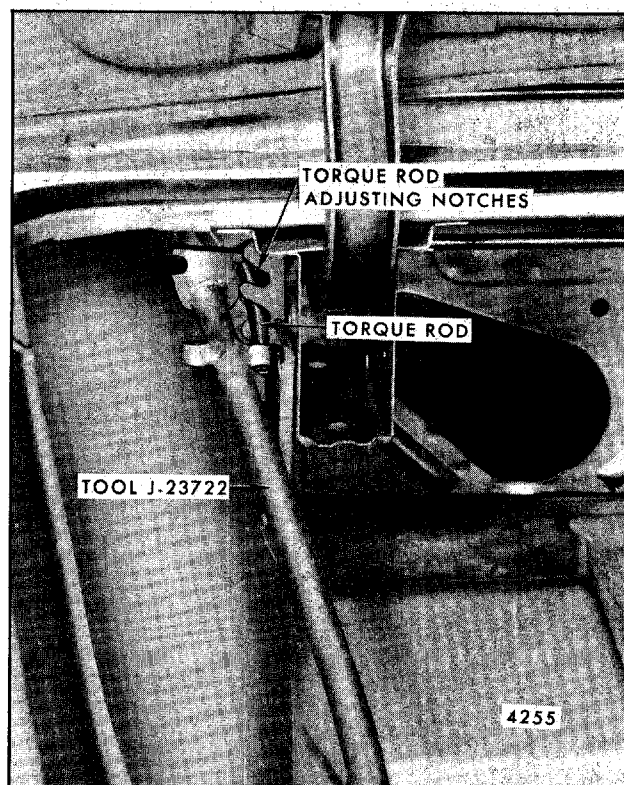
Rear Compartment Torque Rod Adjustment - Cadillac "E"
